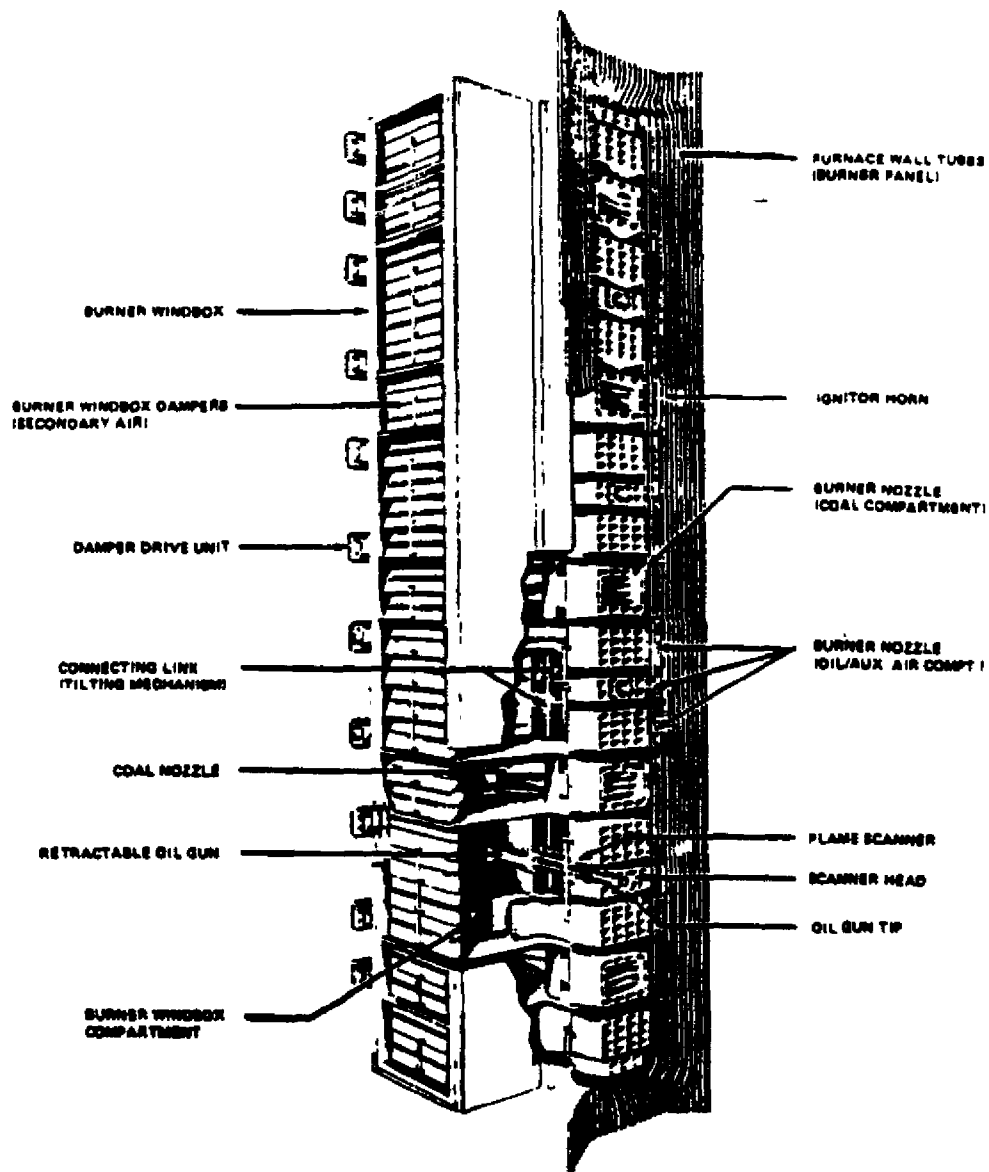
Cutaway View, Typical C-E Tilting Tangential Burner Assembly
